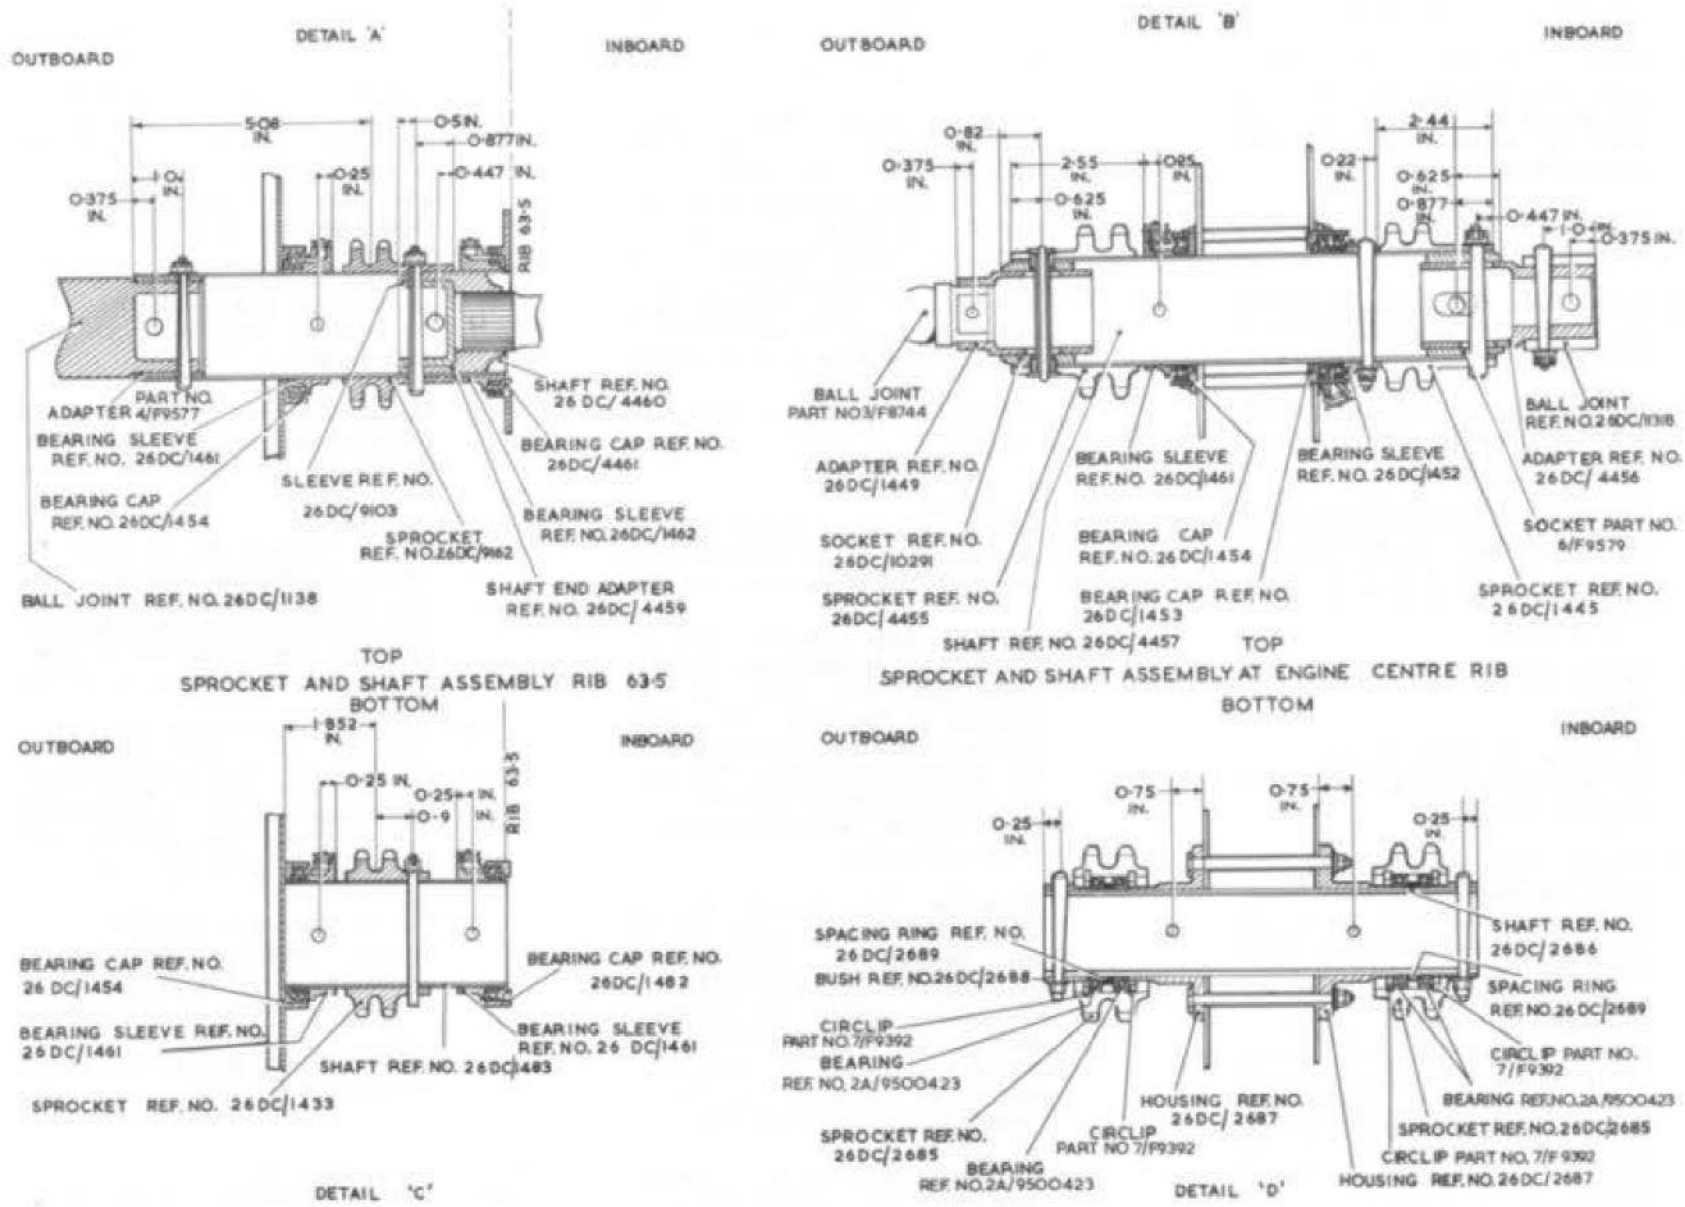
Air brakes sprocket and shaft assemblies (1)
